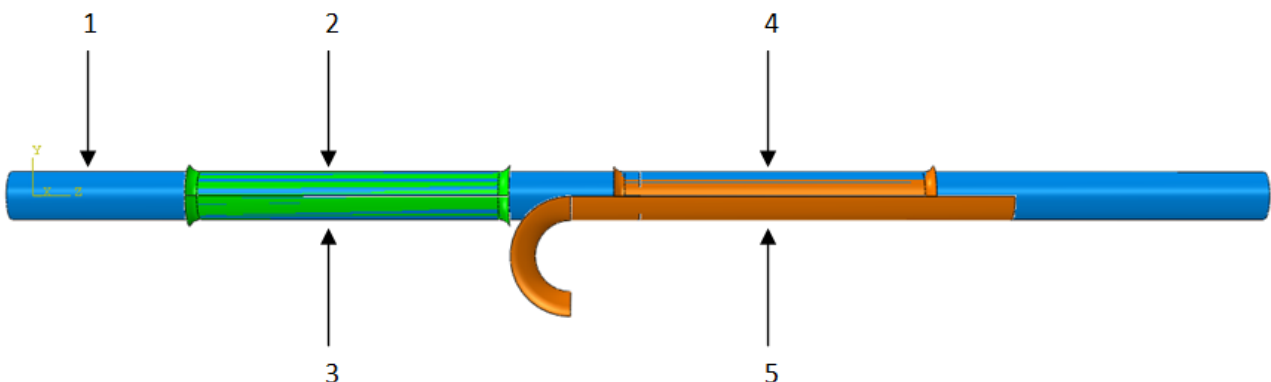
Geometry of numerical model; 1- pipe, 2- upper holder of the feeding head, 3 - lower holder of the feeding head, 4 - upper holder of the bending head, 5 - lower holder of the bending head integrated with rotational die
